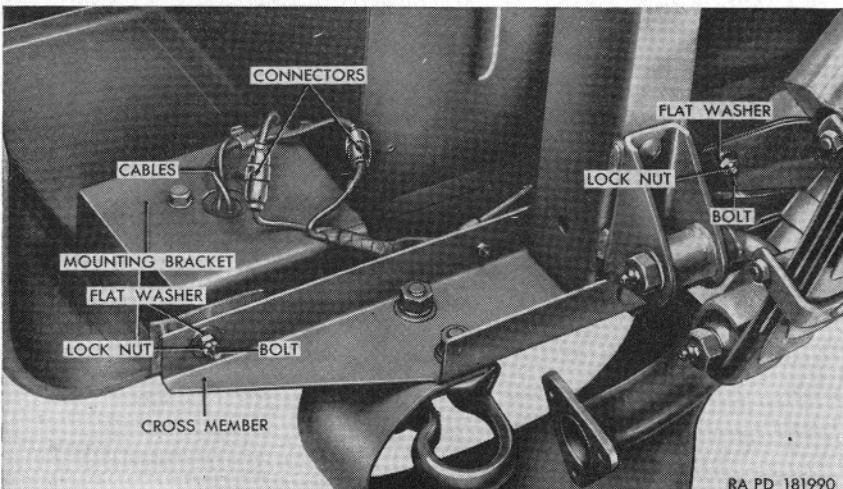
(Added) Body hold-down bolts rear cross member and blackout tail and stoplight cables M170.
